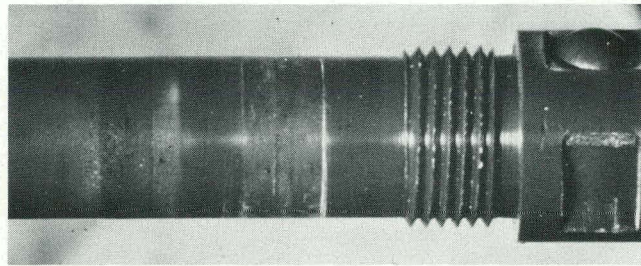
Rod AD-4. Spacer mark and welding zone at the upper end.
